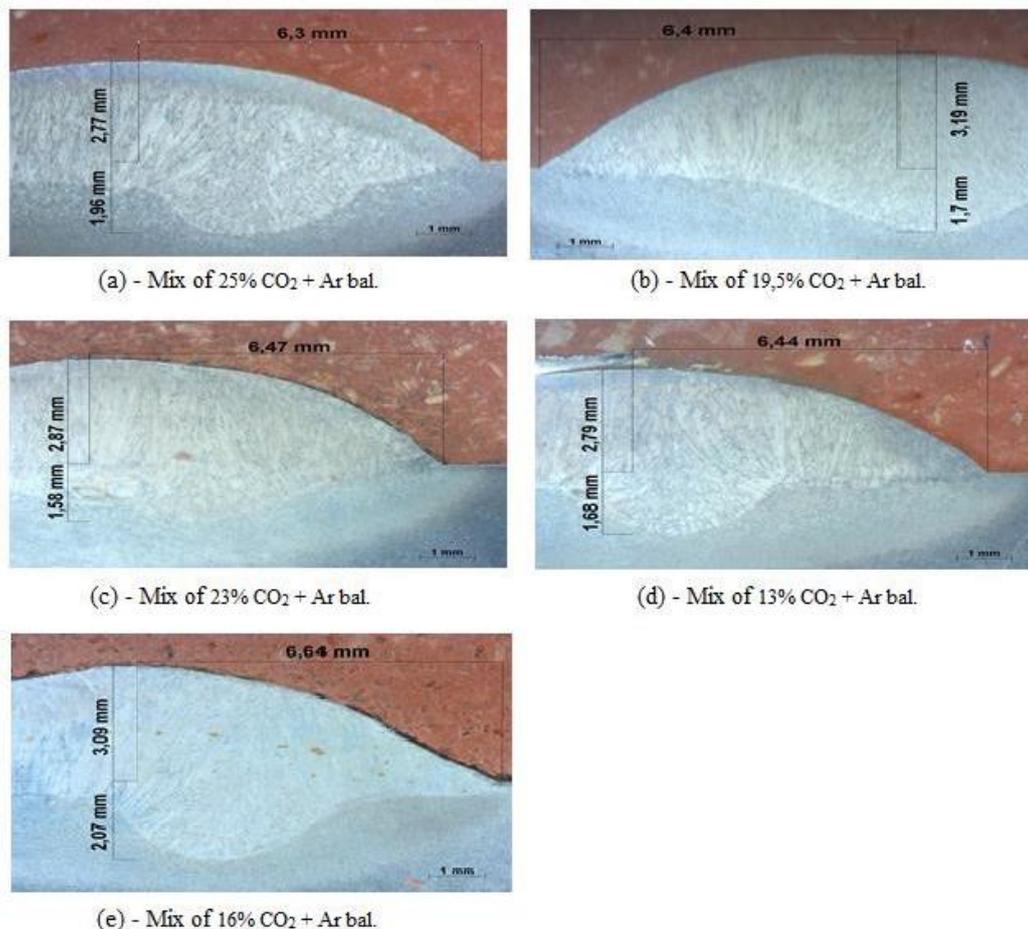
Weld bead results of MAG-CW welding with shielding mixes gases.
